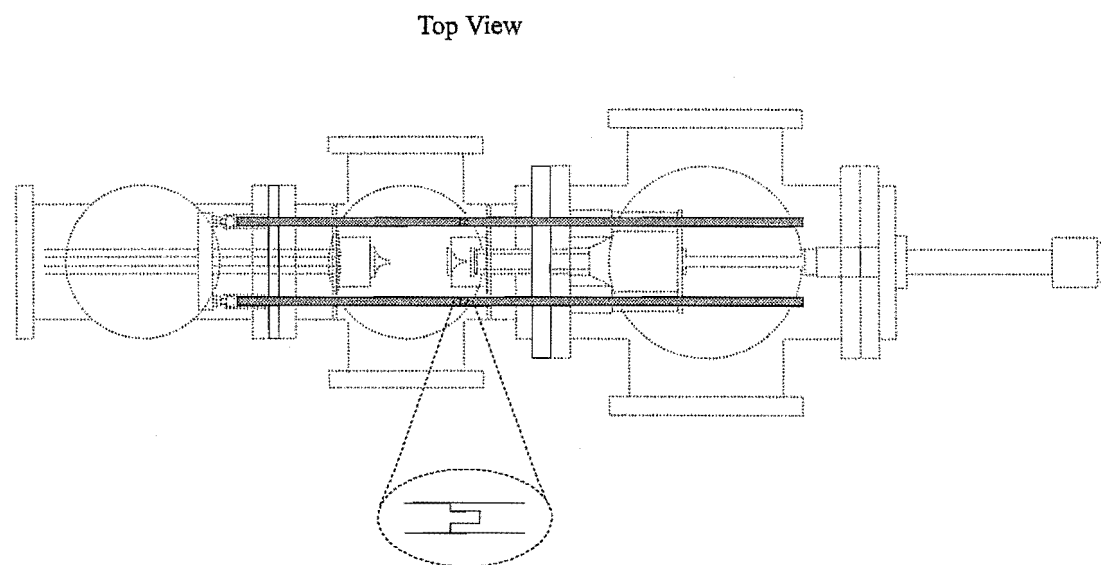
System of two sets of alignment rods (shaded) for correct alignment of the nozzle, skimmers and hexapole. The rods are held in each flange by bushells and grub screws (not shown) on the side of the flange. The two rods are butted together inside the buffer chamber.
